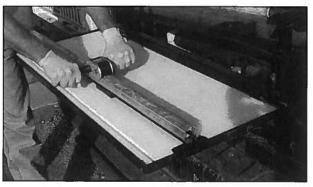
Secure the liner with the universal liner holder for cutting. Always place the liner holder on a solid surface such as the work table shown here.
